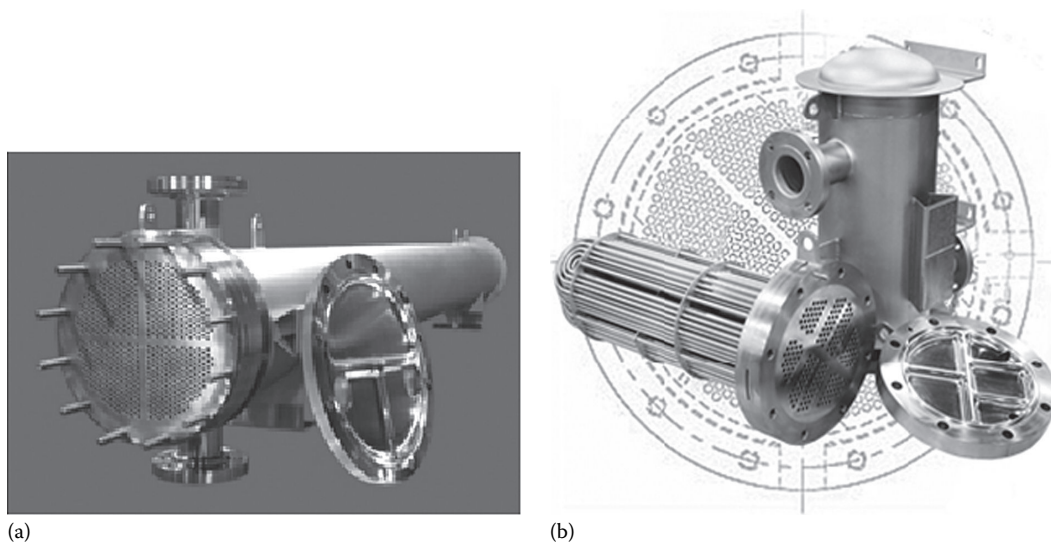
Shell and tube heat exchanger tube bundle assemblies. (a) Four-pass arrangement and (b) eight-pass arrangement. (Courtesy of Allegheny Bradford Corporation, Bradford, PA.)
